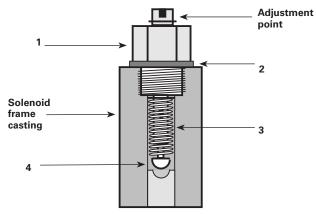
Adjustable control valve assembled into casting. See Table 13 for parts identification
